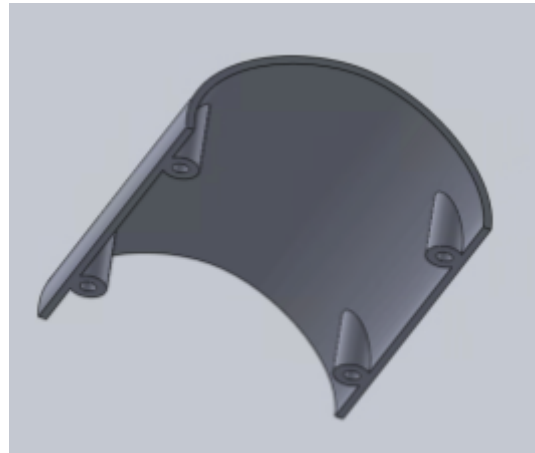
Part of the extra socket piece to the prosthesis (Made by T. Tran in Solidworks, 2023).
